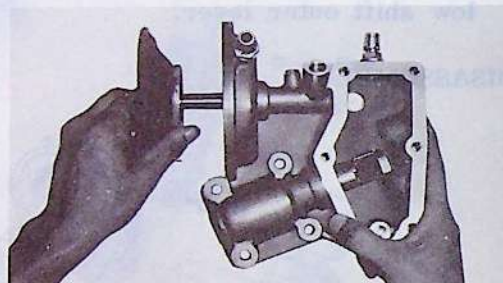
Removing Diaphragm Push Rod & V5060 Diaphragm
